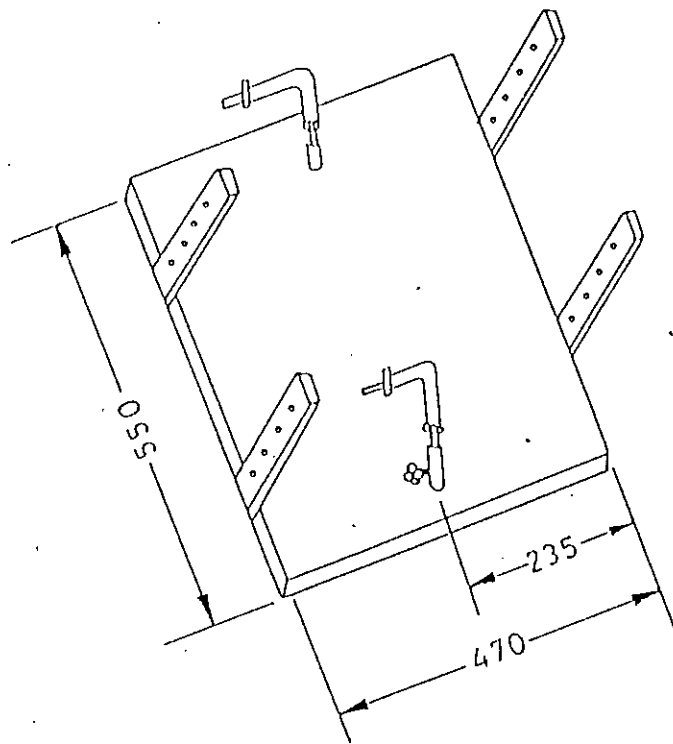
DETAILS OF THE COLD PLATE ASSEMBLY.
